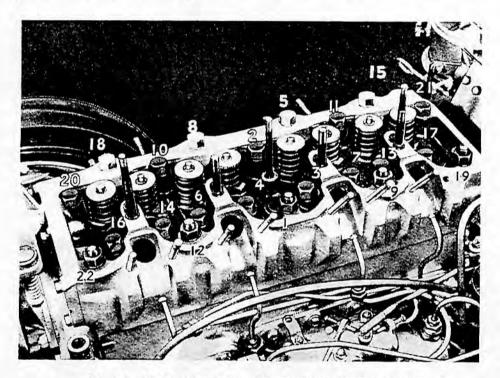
ORDER OF TIGHTENING CYLINDER HEAD SET SCREWS
